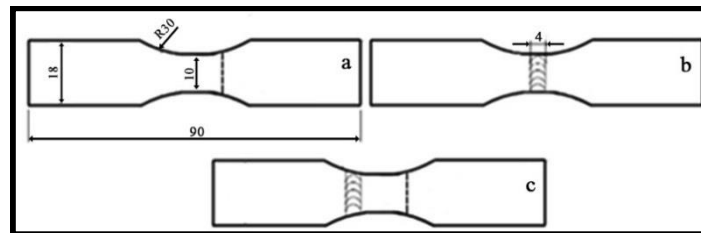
Fatigue tests of samples obtained from a) non-welded sheets b) butt welded sheets c) overlap welded sheets [22, 27-32, 48-51].
